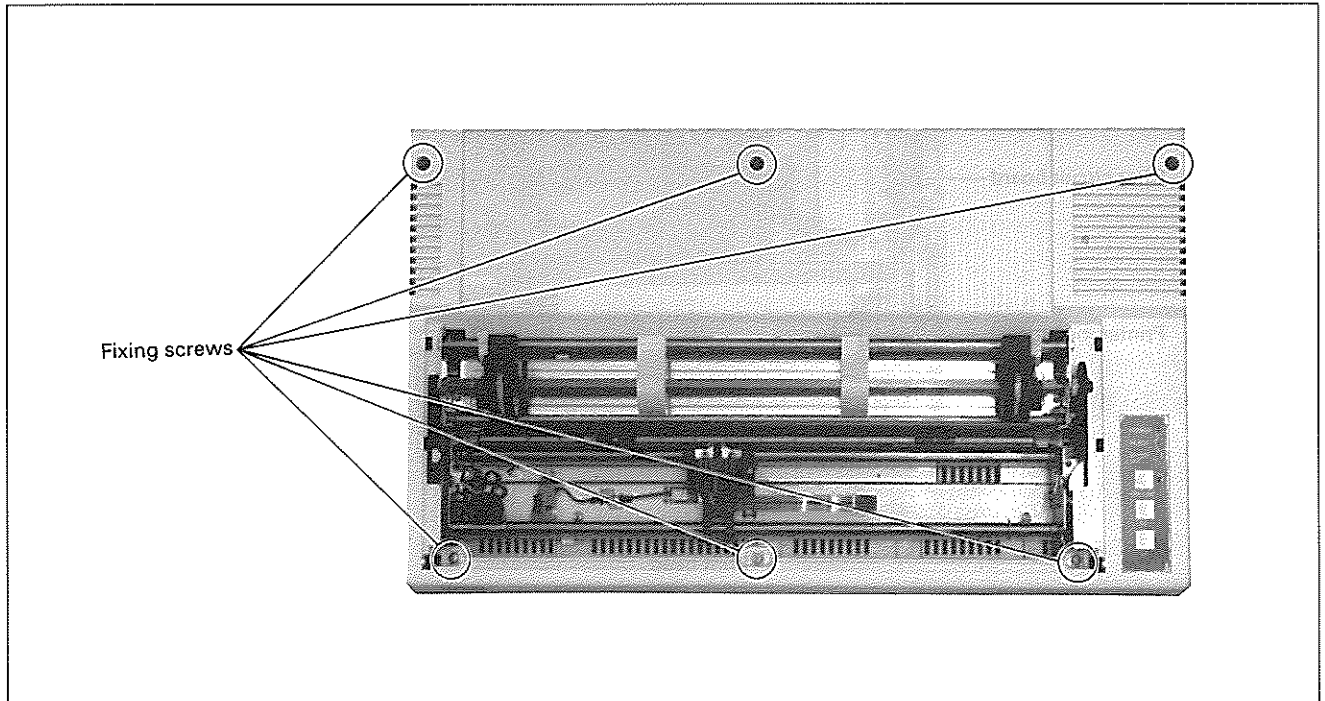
Location of Upper Case Fixing Screws. (FX-100+/FX-185/105)
